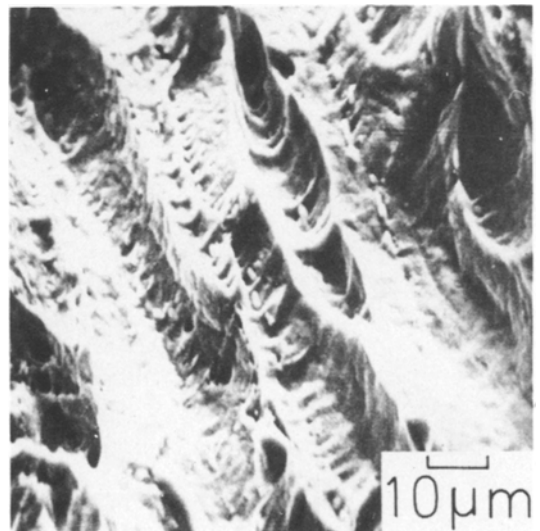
Fracture surface from solution-treated material, showing ductile fracture. Note MnS particles.
